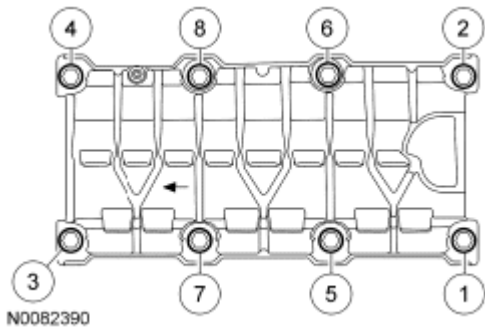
Identifying Main Bearing Cap Support Brace Bolt Tighten Sequence
